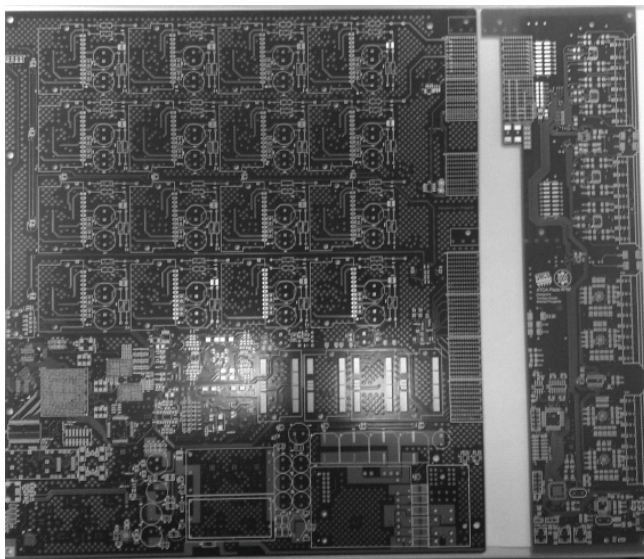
The photograph of PCB board of ATCA-based piezo compensation system. On the left side Carrier board, on the right side RTM module.
